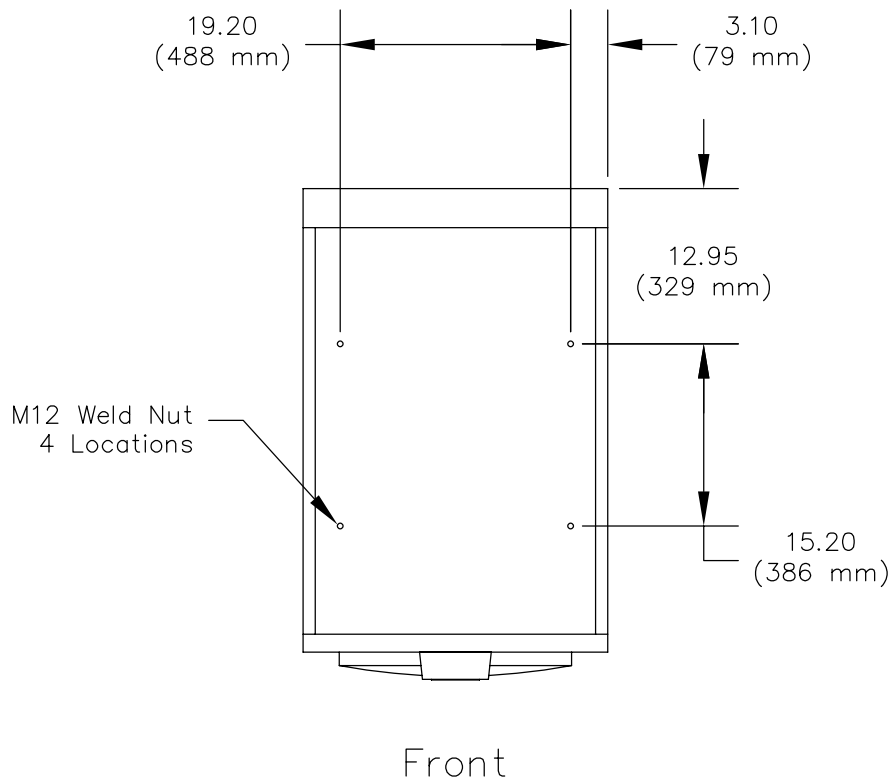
System Weld Nut Locations (Short Rack)
